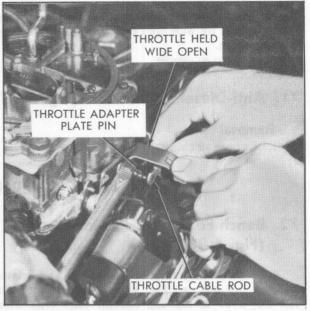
Throttle Cable Adjustment (Eldorado)
